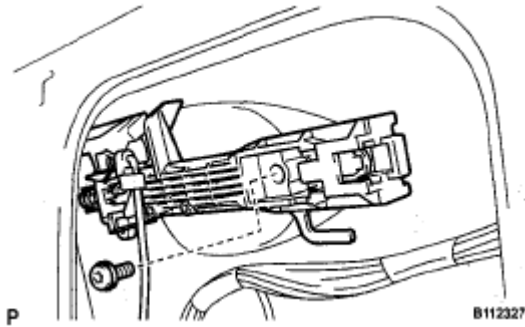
Identifying Front Door Outside Handle Frame Screw
